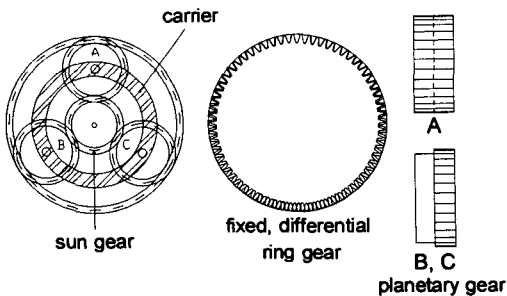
The schematic diagram of 1-tooth differential ring gear mechanism.
